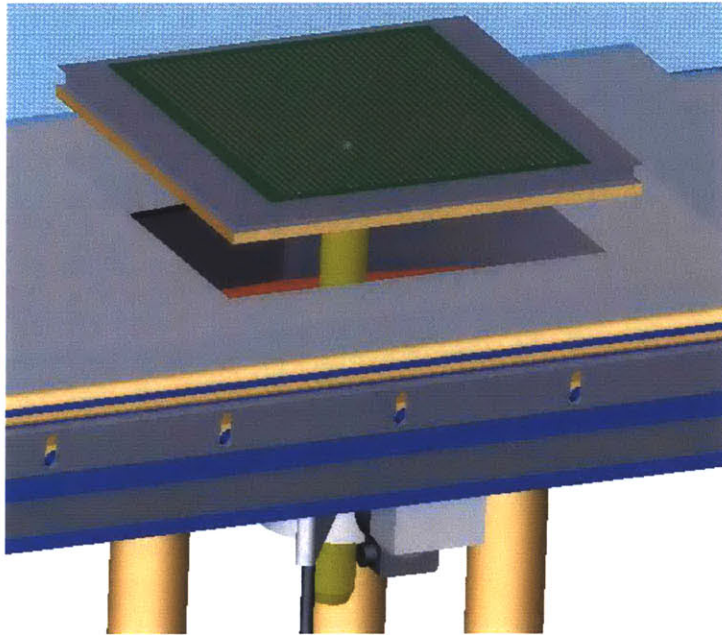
3D model assembly showing cassette mounting in dynamometer
